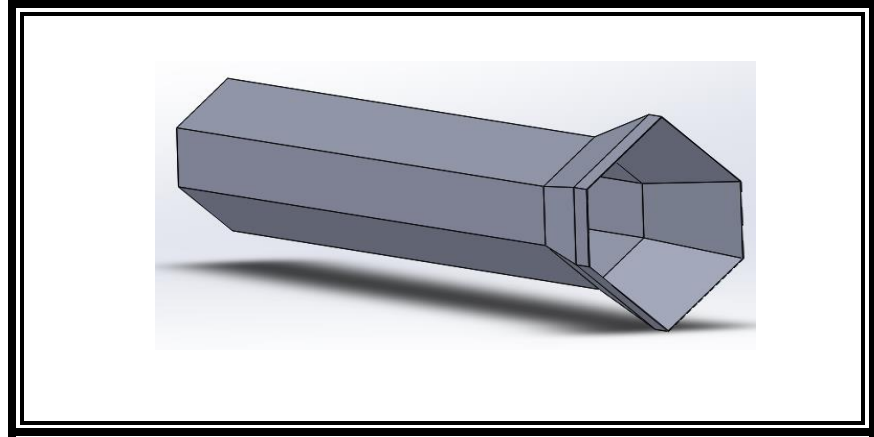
Single hexagonal tube geometry of NBB enclosed solid particle receiver.
